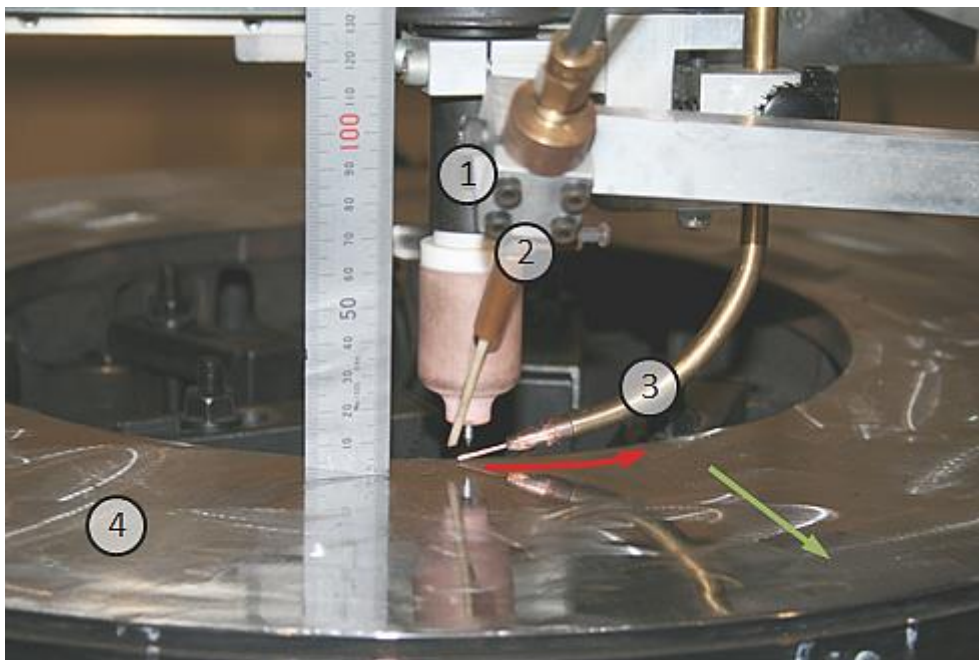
GTA brake disc cladding, starting position before welding (sample: 640 mm outer diameter disc); 1: TIG torch; 2: Powder feeder nozzle; 3: Wire feeder nozzle; 4: Fresh ground brake disc; red arrow: cladding direction (or direction of disc movement); green arrow: overlapping bead direction
